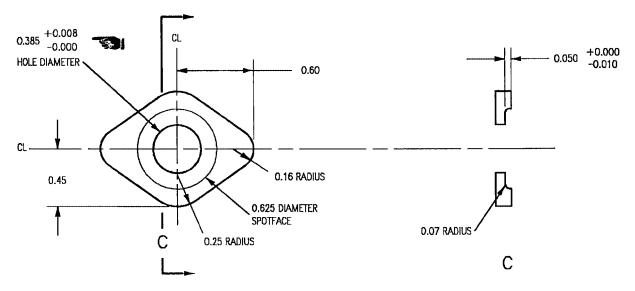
Door 3 Fastener Hole Repair (Sheet 2)
